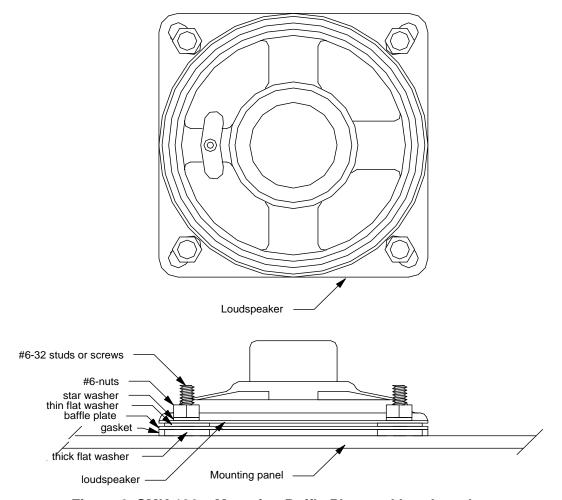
SMK-136 – Mounting Baffle Plate and Loudspeaker
